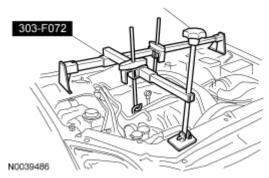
Identifying Special Tool (303-F072) Courtesy of FORD MOTOR CO.
